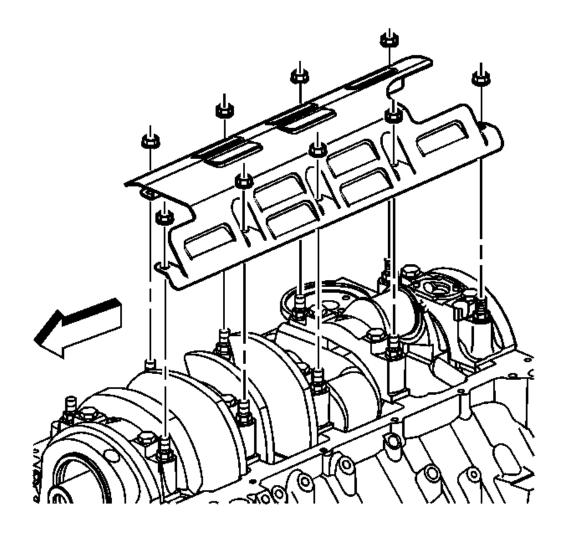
View Of Crankshaft Oil Deflector & Nuts Courtesy of GENERAL MOTORS CORP.
